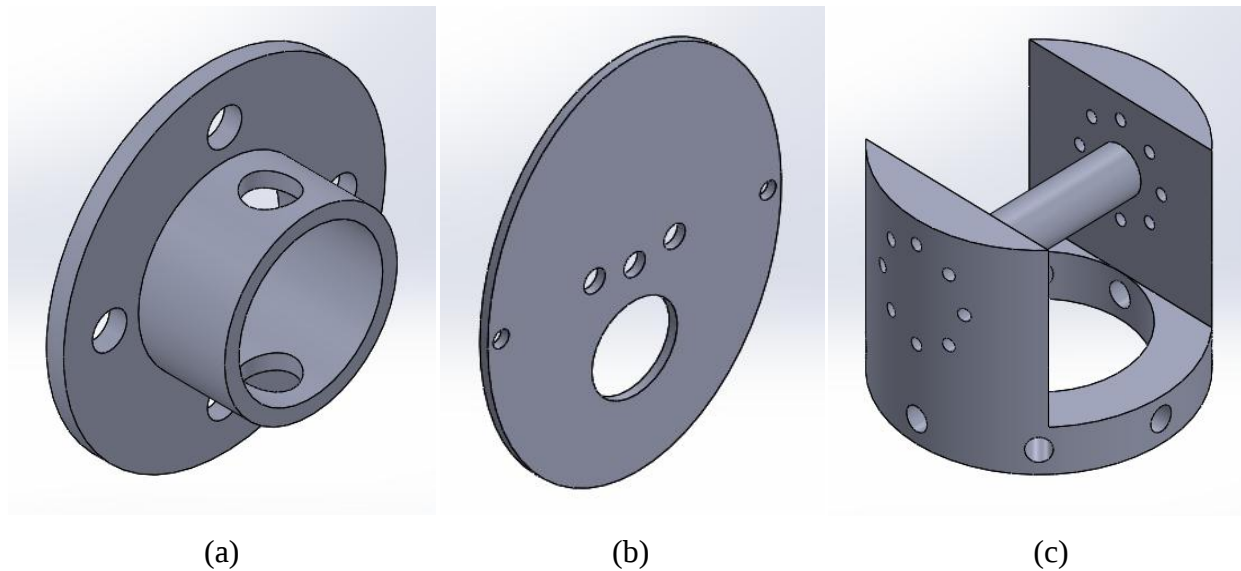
(a) Connector (b) Gearbox cover (c) Coupler
